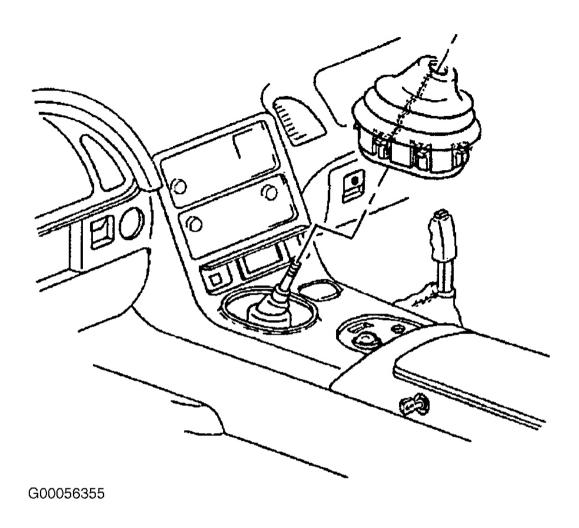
Removing/Installing Shift Boot Courtesy of GENERAL MOTORS CORP.
